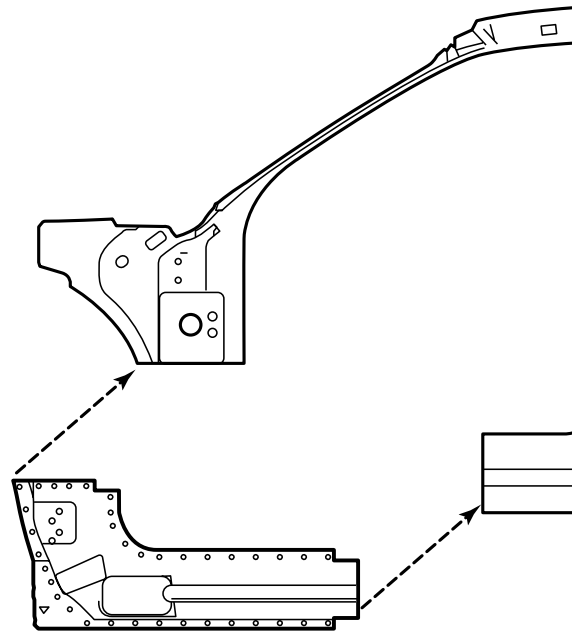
2000 DeVille Inner Center Pillar Detail
